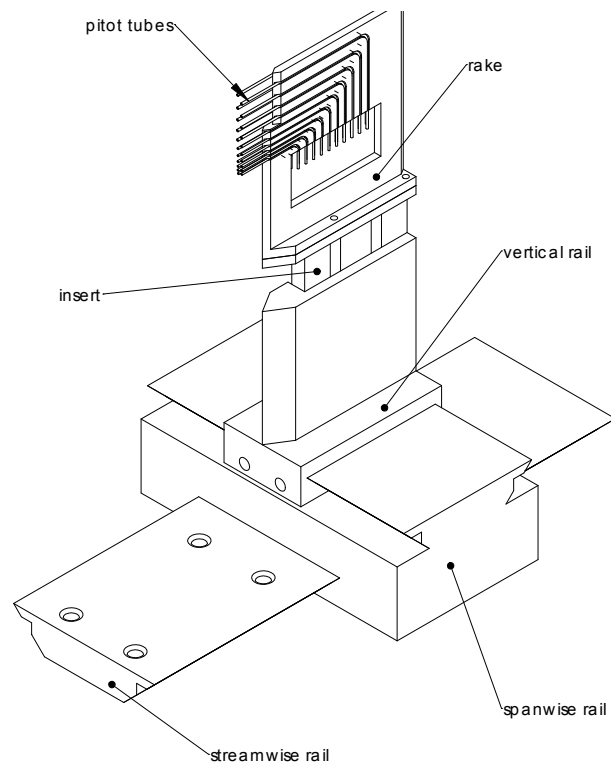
CAD drawing of the assembly of the micro pitot rake together with rails.
